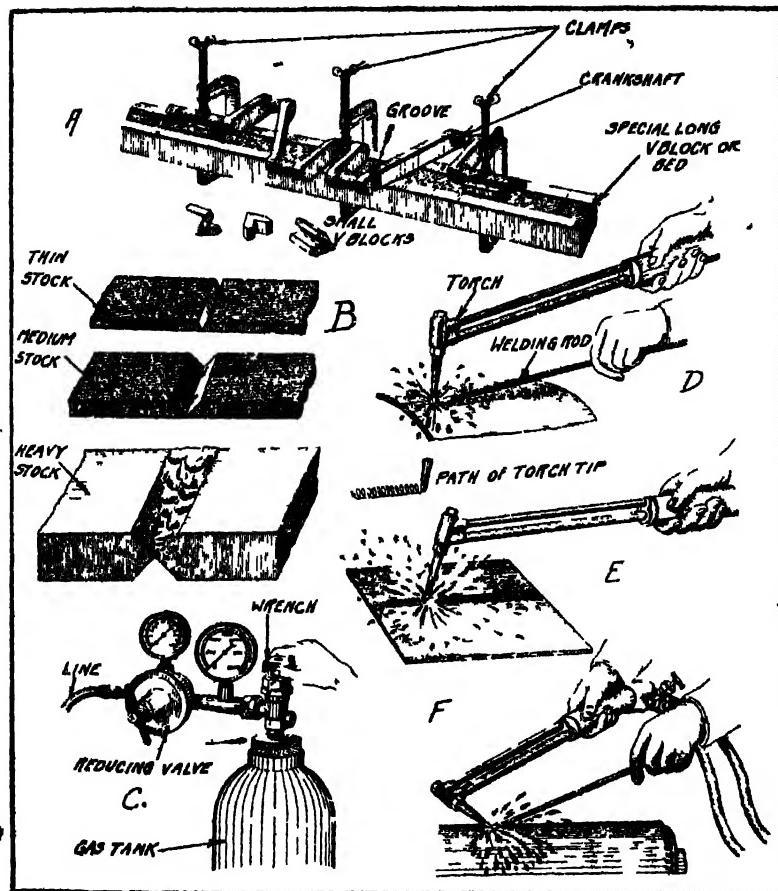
Illustrating Various Steps in Autogenous Welding Operation, Such as Preparation of Work and Manipulation of Torch. A—Method of Holding Crankshaft When Welding Broken Web. B—Forms of Grooves for Welding Various Thicknesses of Stock. C—Showing Method of Attaching Reducing Valve to Gas Tank. D—Method of Using Welding Rod. E—Showing Path of Torch Tip. F—Filling a Hole by the Autogenous Welding Process.
